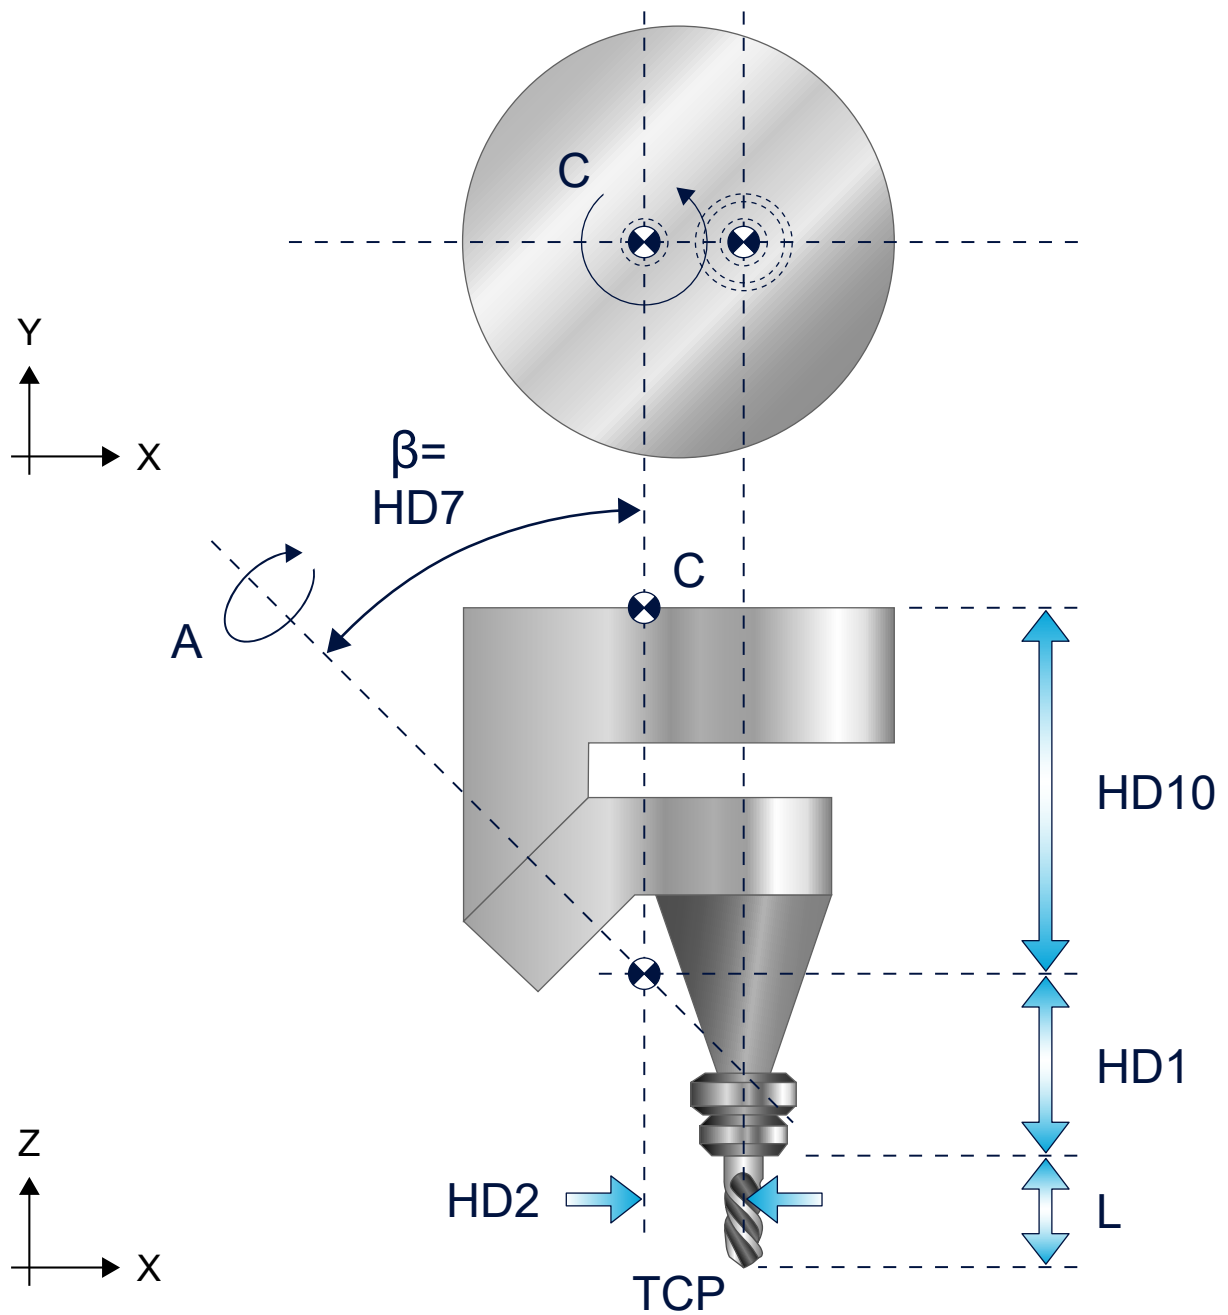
Cardanic head with offset C axis (C axis not located in tool axis)
